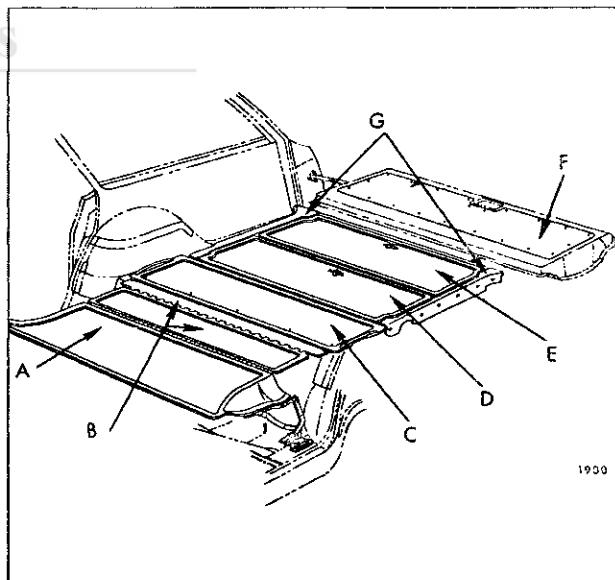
Folding Seat and Floor Panels - Chevrolet "B-35" Styles
